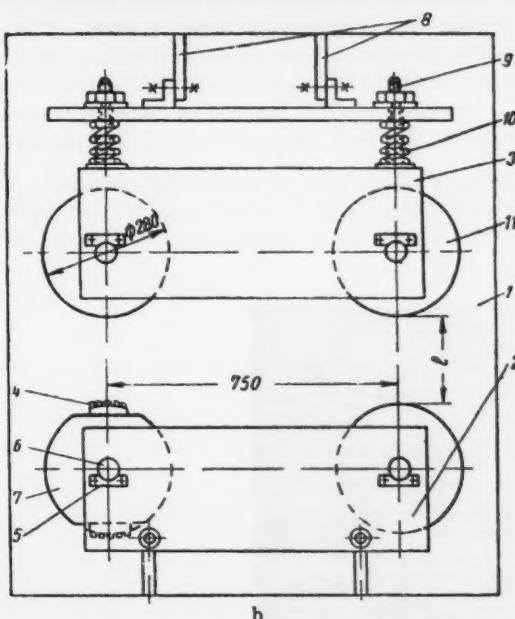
Undriven stamping machine: 1) Plate; 2 and 3) fixed and movable holders; 4) brand holder; 5) cross bar; 6) roller axle; 7) stamping roller; 8) hinge; 9) screw; 10) spring; 11) guide roller.
